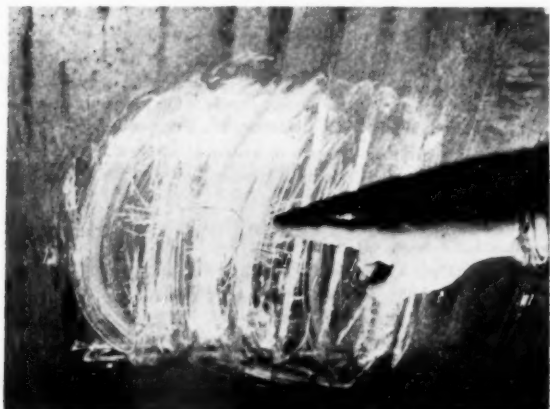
CRACK ON INSIDE OF TANK WALL WHERE GAGE-BOARD BRACKET HAD BEEN WELDED ON OUTSIDE OF TANK
